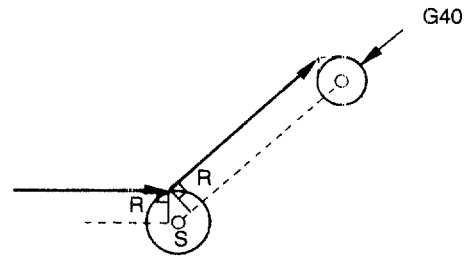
Straight-line to Straight-line at Outside Corner
